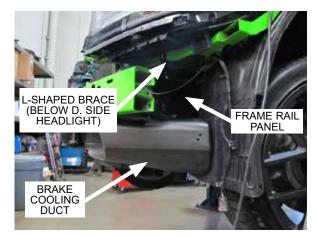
I: Remove both brake cooling ducts, frame rail panel and L-shaped brace
